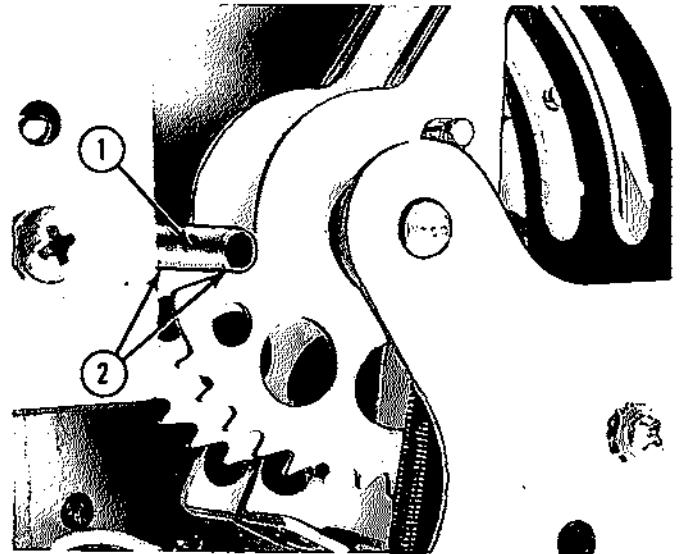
STOP LEVER AND QUADRANT INDEXING STRIP ADJUSTMENT
